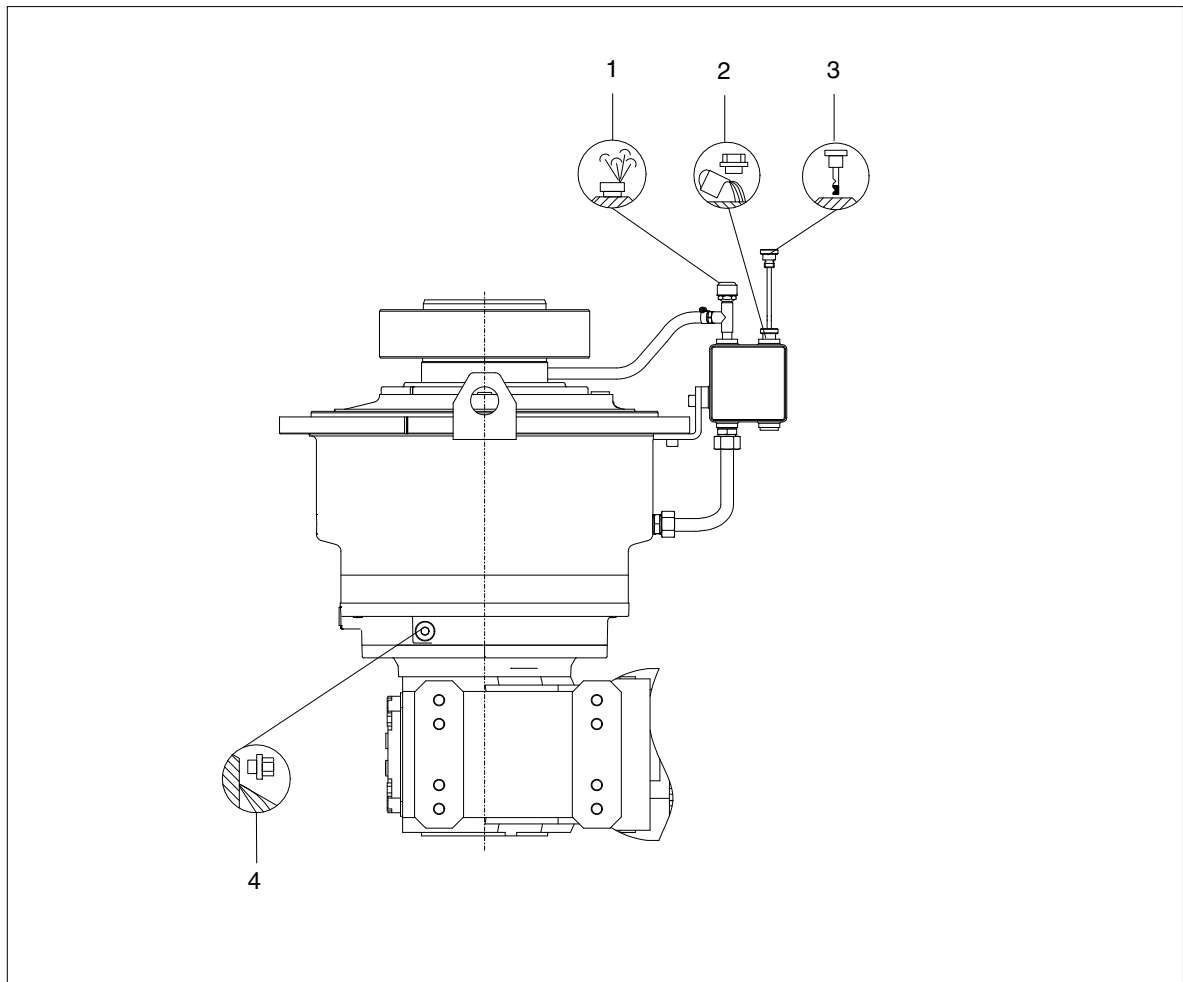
Gear-unit features on gear units of type O5R ("LSS" bottom) <sup>1)</sup>
